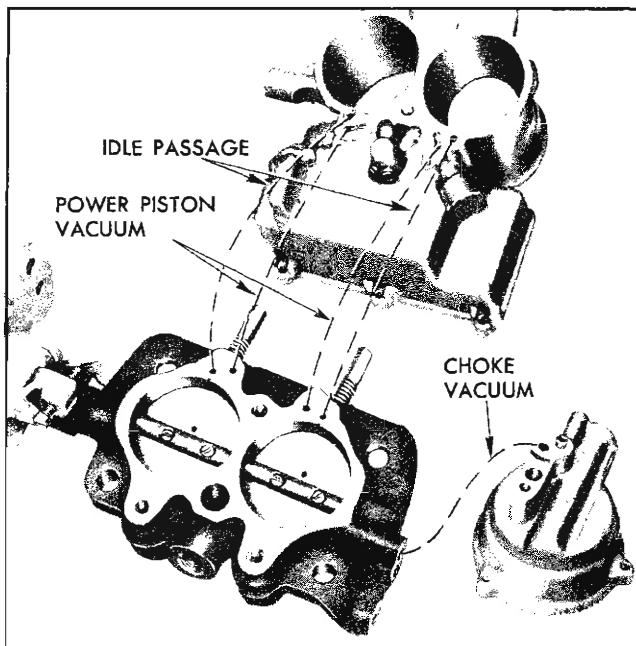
B-78 Passage Identification—Flange—Bowl—Choke Housing
